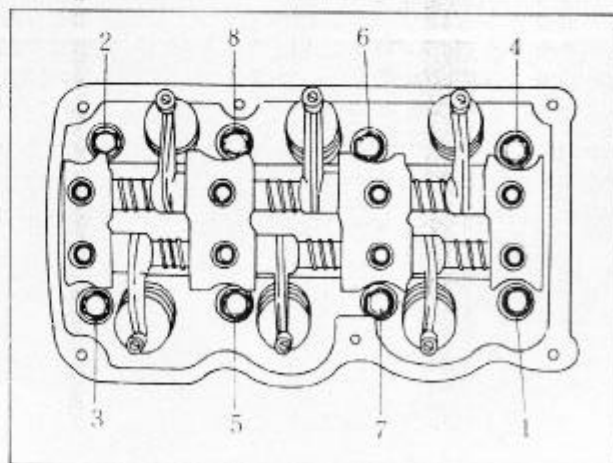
A — 40 REMOVAL OF CYLINDER HEAD BOLTS
